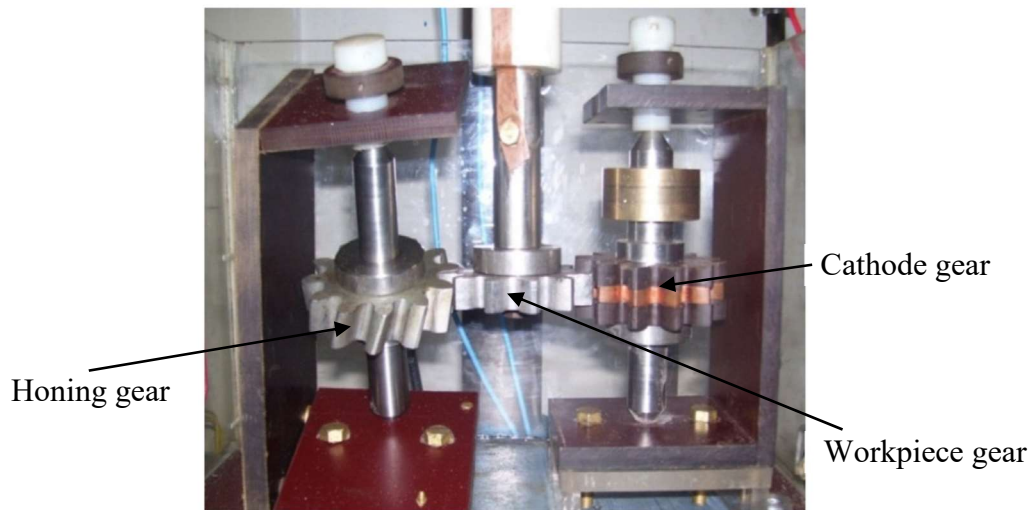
Finishing of cylindrical gears by ECH [11]
